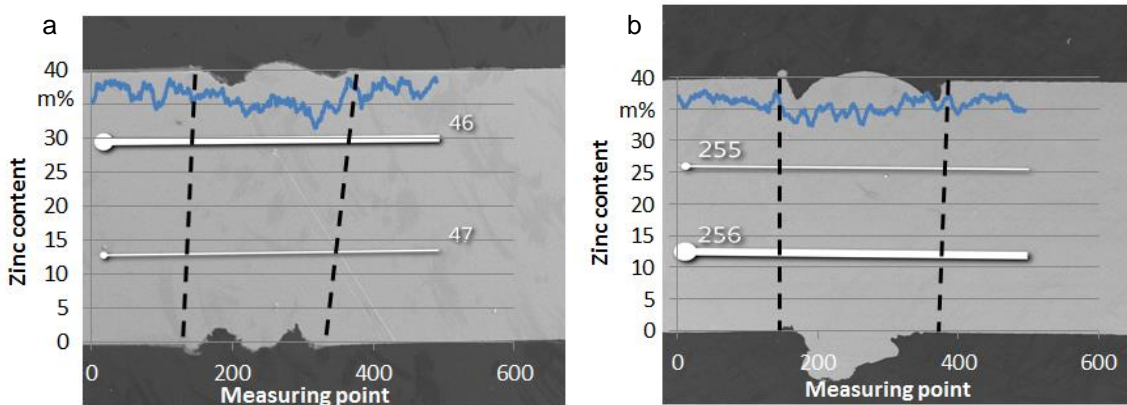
Zinc content in weld zone of CuZn37 welded with (a) 3 kW and 66 mm/s and (b) 3 kW and 200 mm/s
